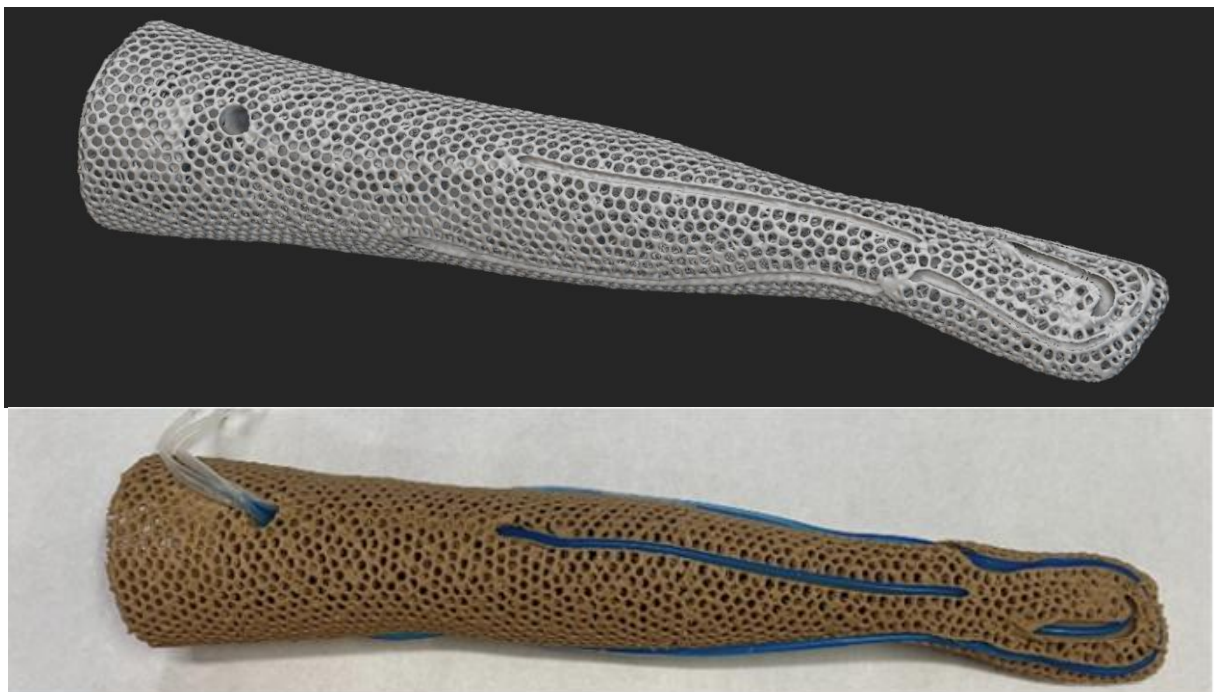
Top view of final core model: (a) digital lattice design and (b) physical prototype.
